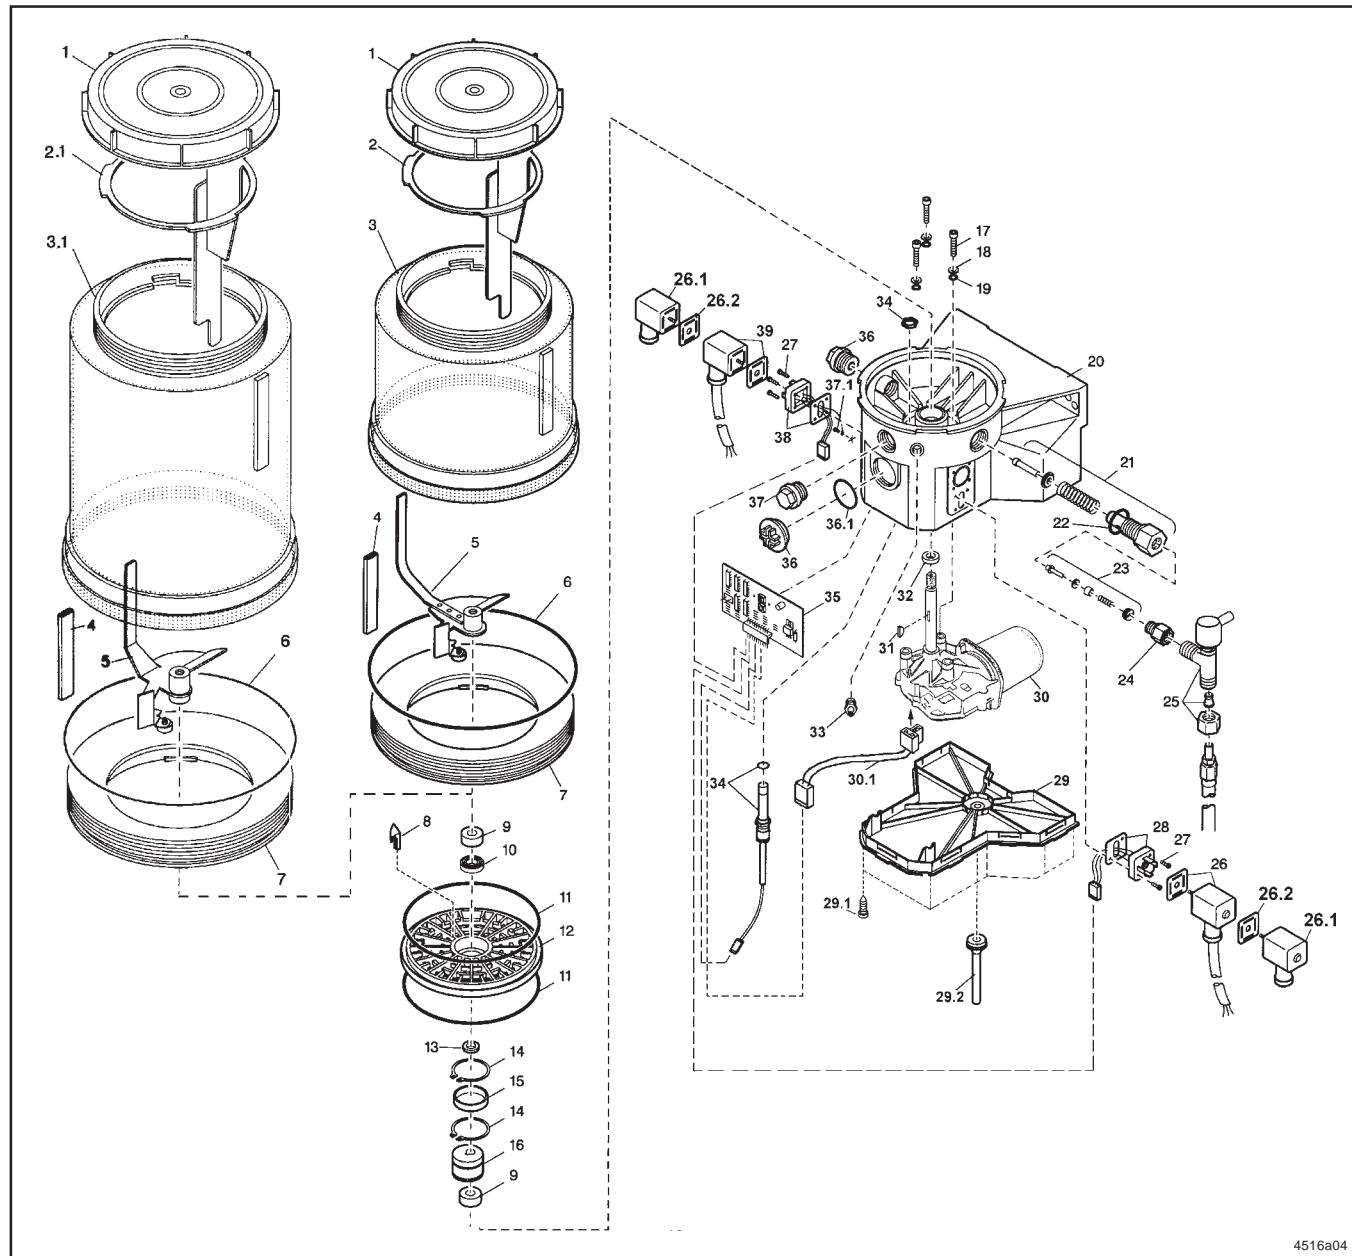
Explosion view for P 203 -4XLBO/8XLBO-K-12/24-2A1.01/10
